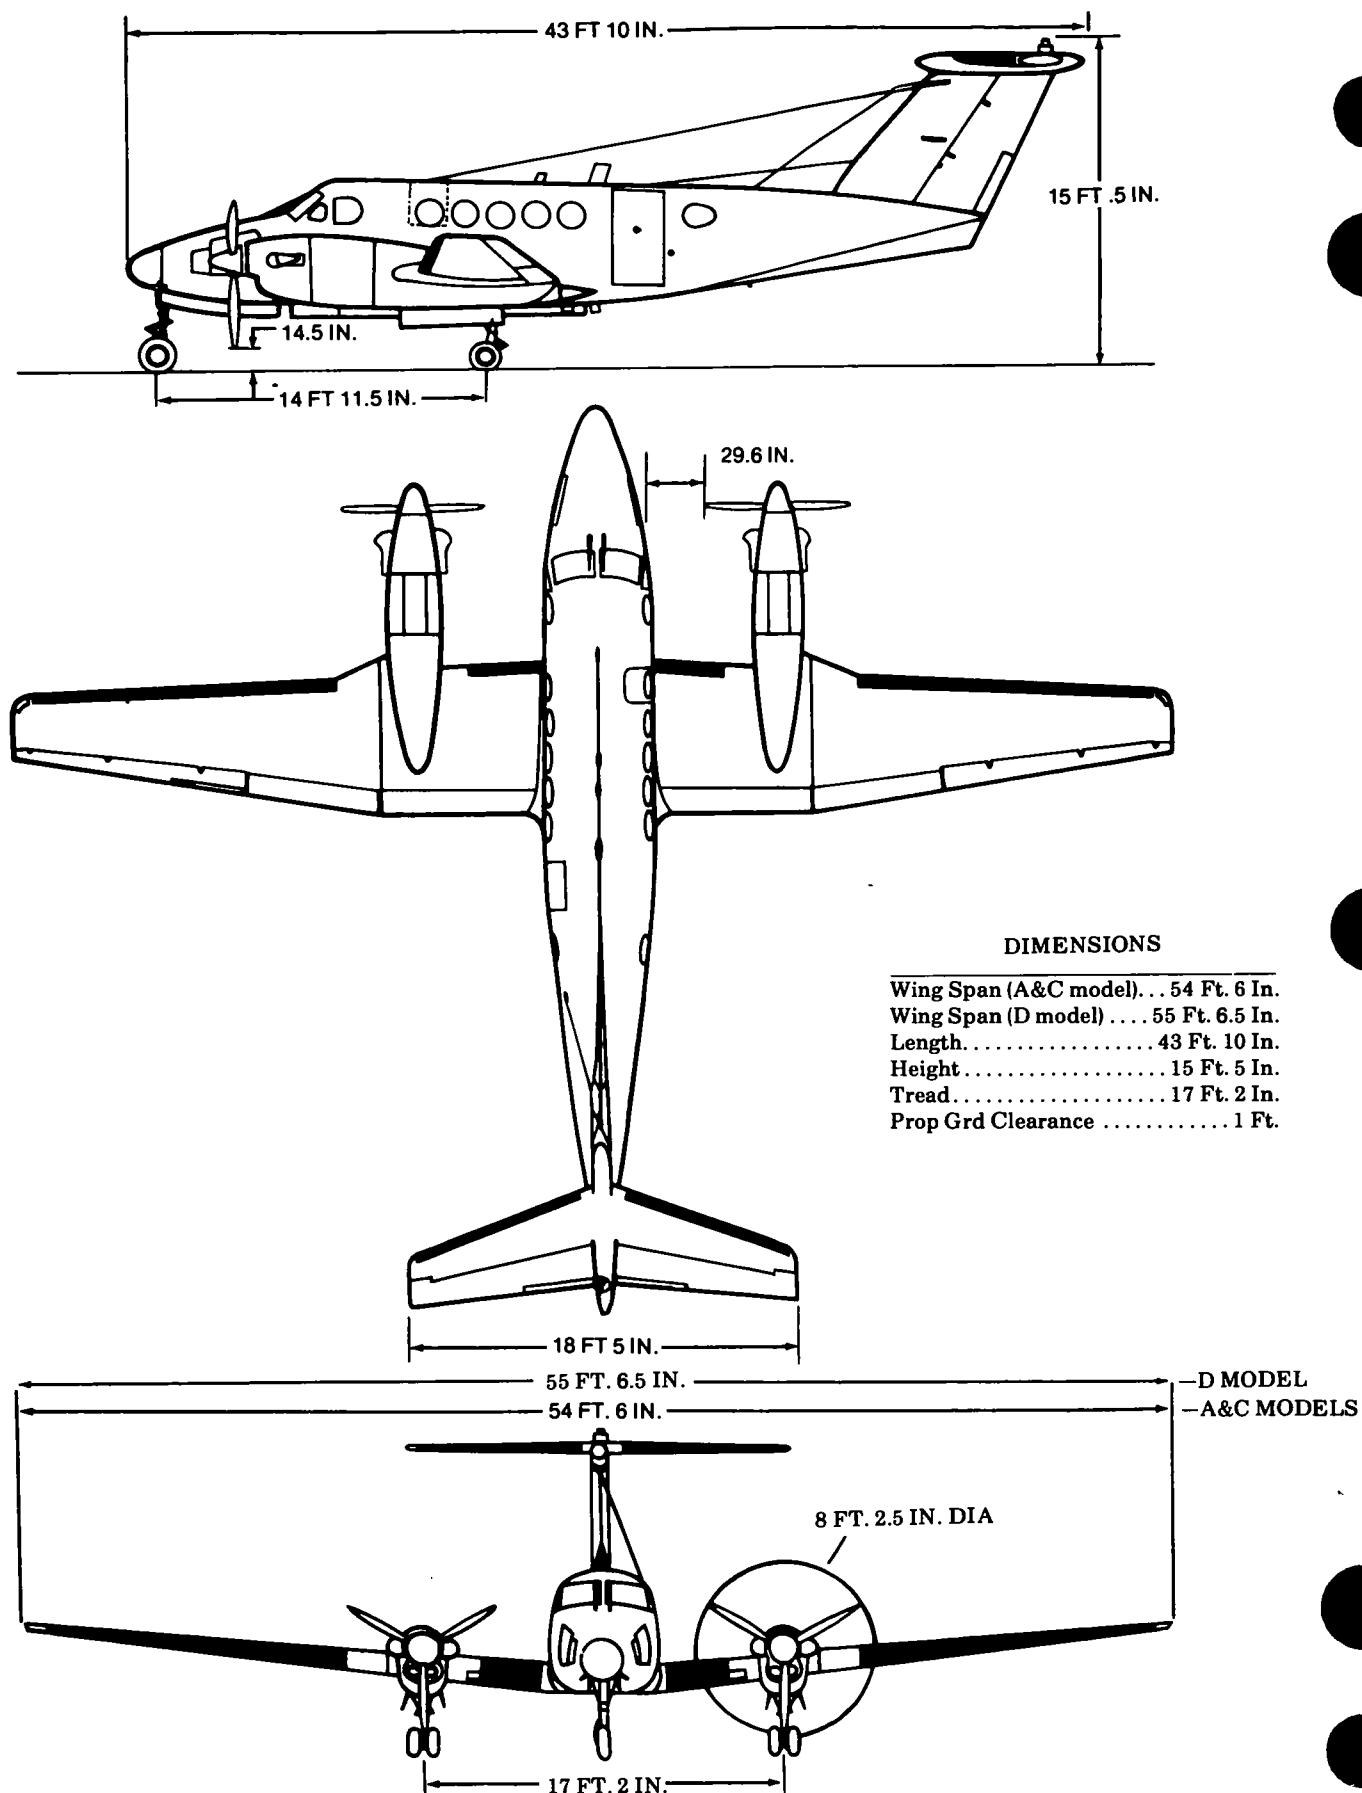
Principal Dimensions, C-12A, C & D (Huron)
